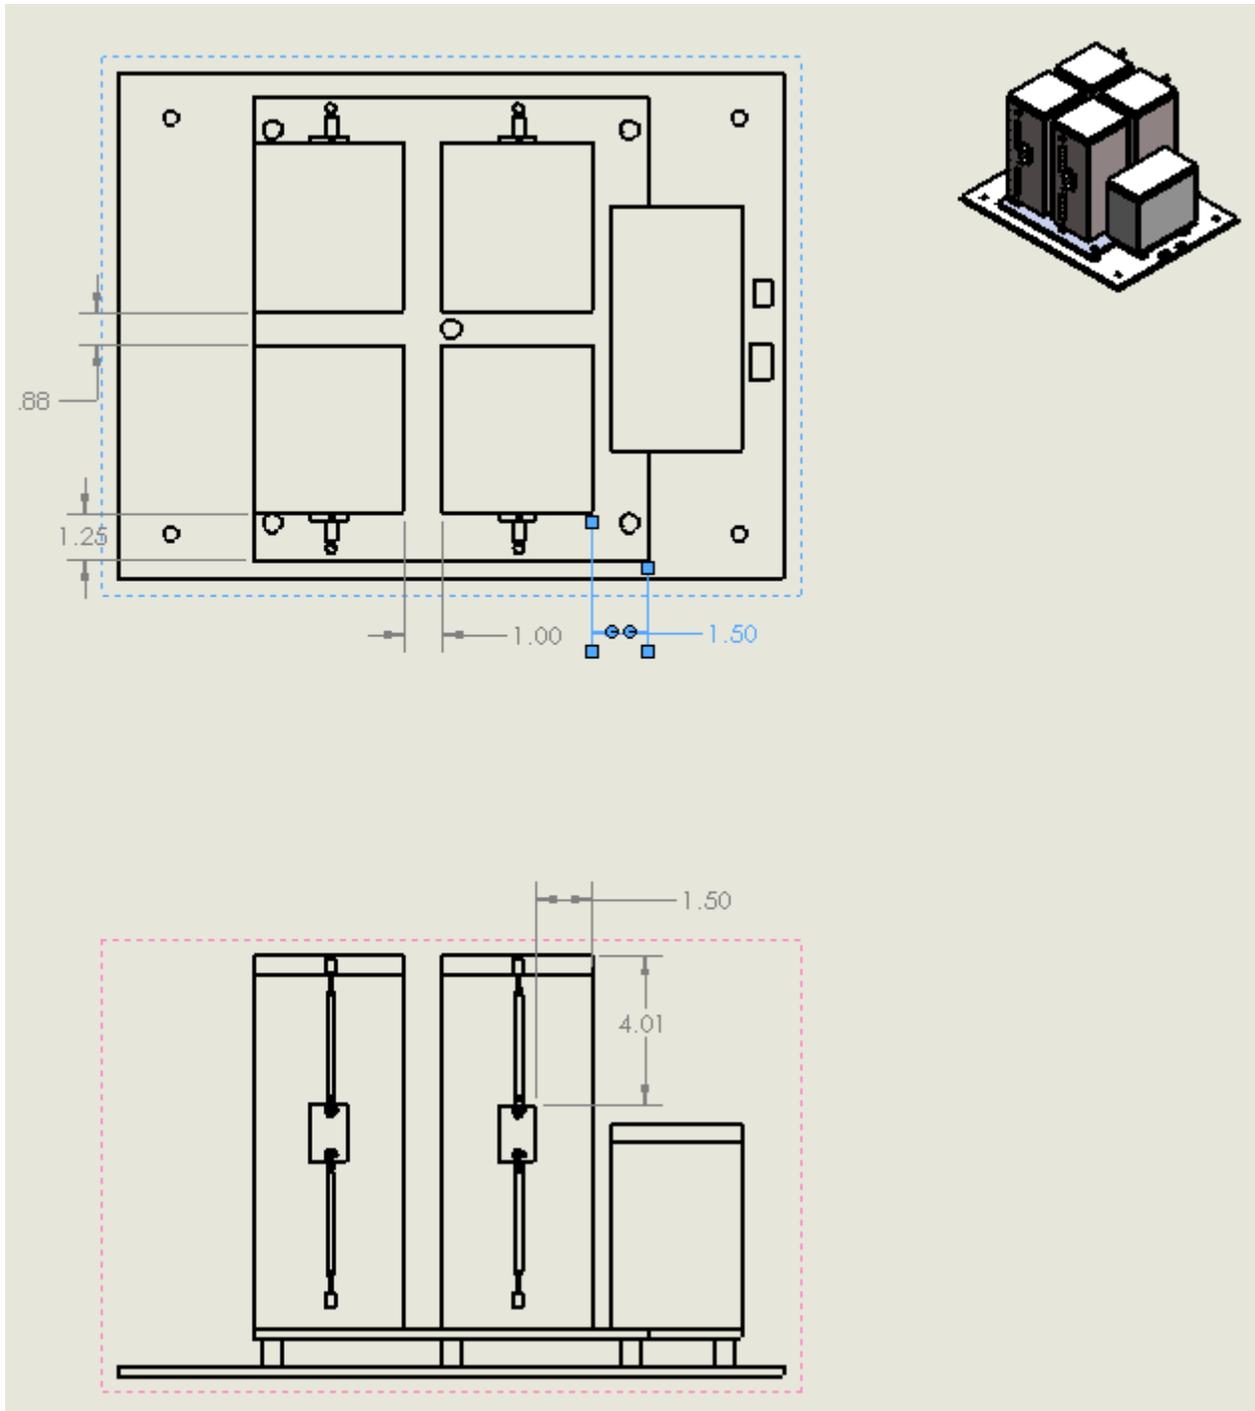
Full Payload Assembly drawing detailing antenna and payload box placement and the payload footprint on the HASP plate. Dimensions in inches.
